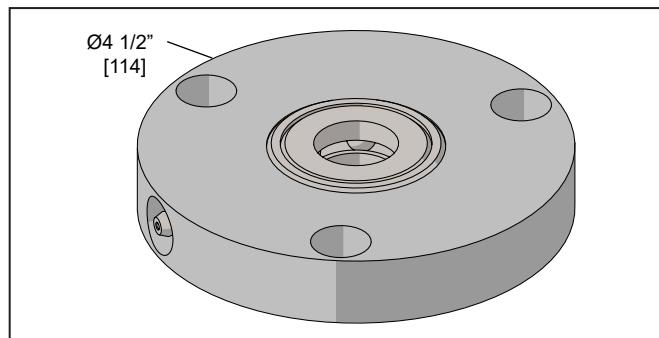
Surface mounted floor pivot assembly DS3423-010
